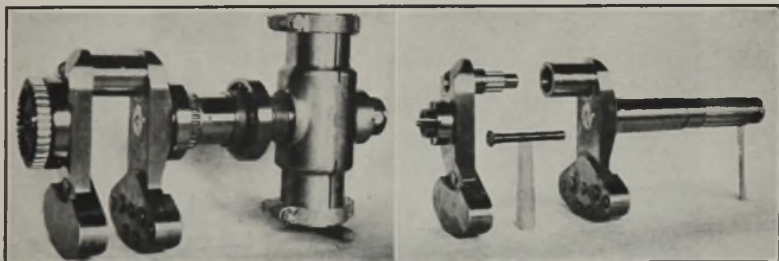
Crankshaft used in the Pratt and Whitney radial-type aircraft engine.
